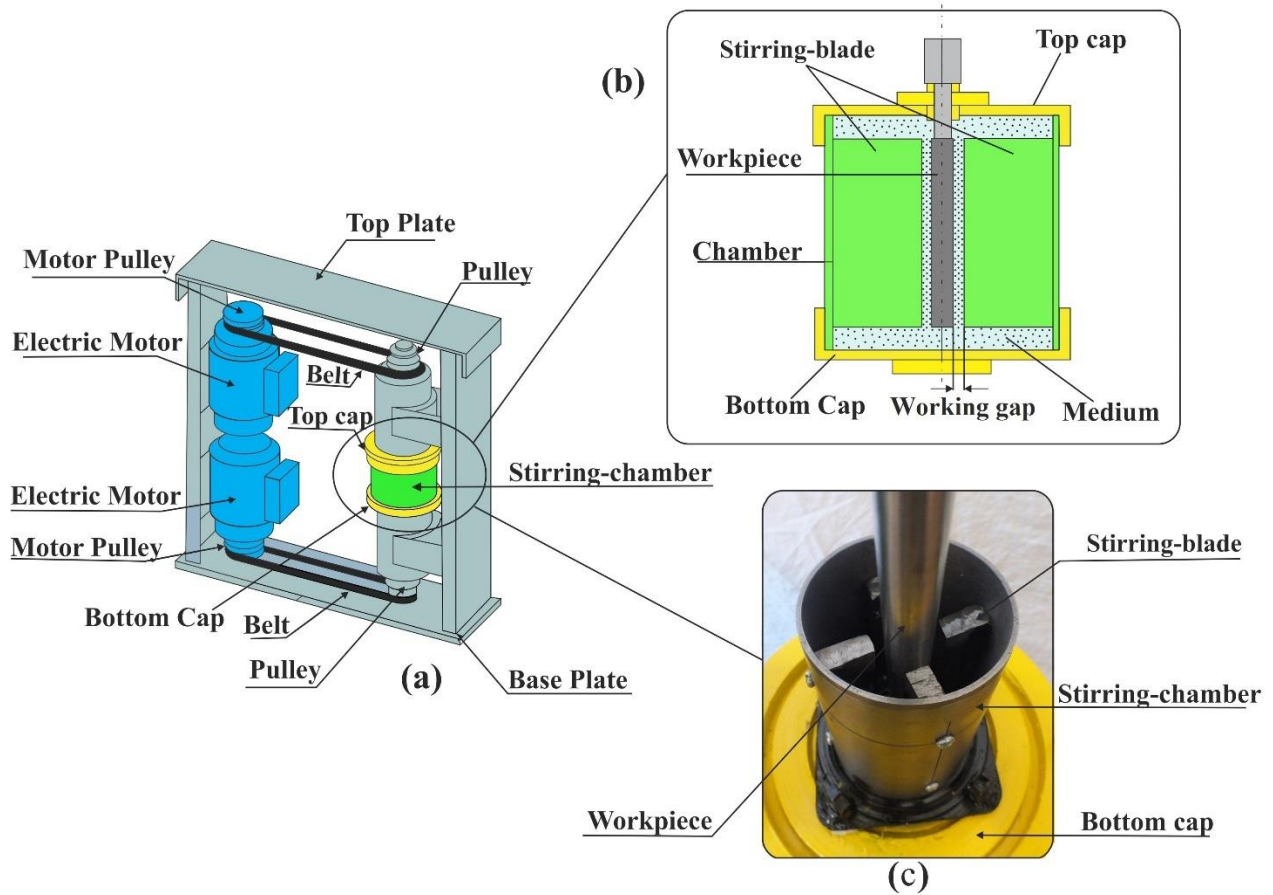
Schematic of (a) RAF set-up and (b) magnified view and (c) photograph of the stirring chamber and workpiece assembly.
